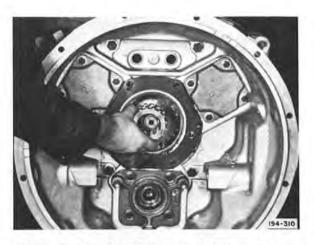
Installing Fourth/Fifth Speed Sliding Clutch
